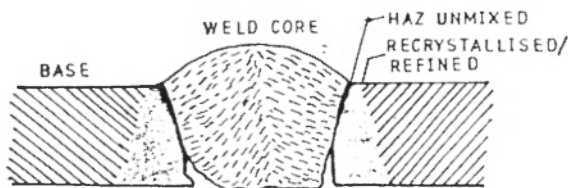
Preferential HAZ corrosion attack in carbon steel weld Aqueous (Environment)
